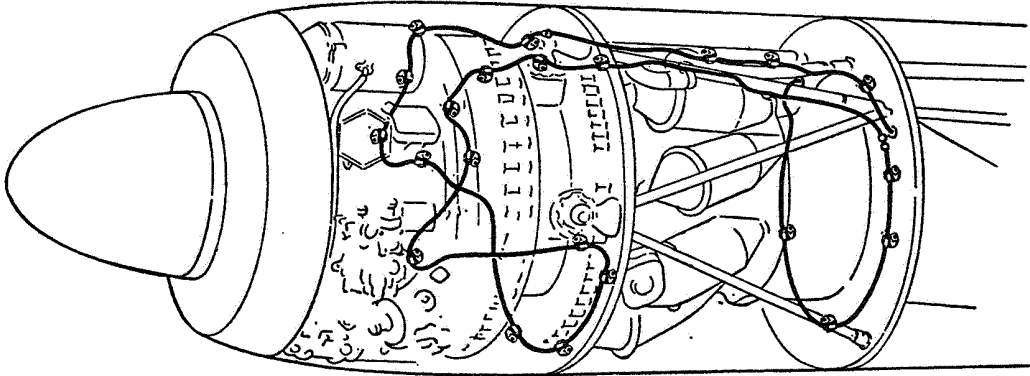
TYPICAL CONTINUOUS ELEMENT INSTALLATION
